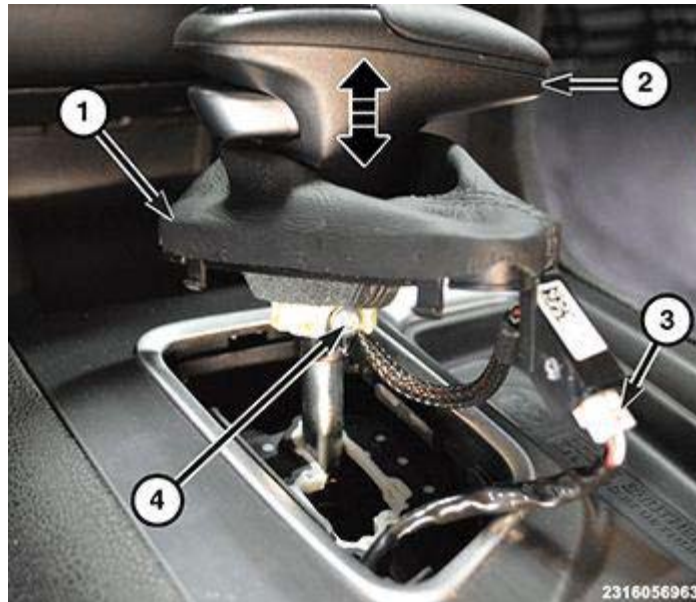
Shifter Bezel, Knob, Connector & Screw
